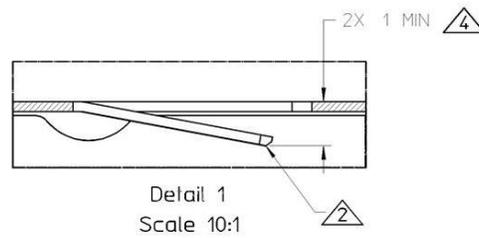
CAGE DIMENSIONS (2 OF 2)
